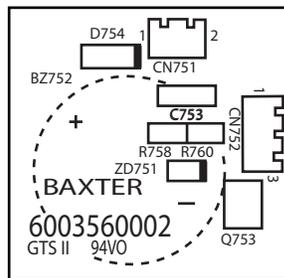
Backup Audible Alarm PCB Assembly (CPWBN104.C)
